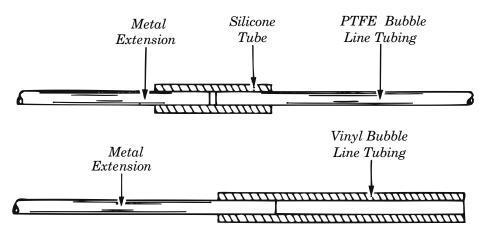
Installing the Stainless Steel Bubble Line Extension
